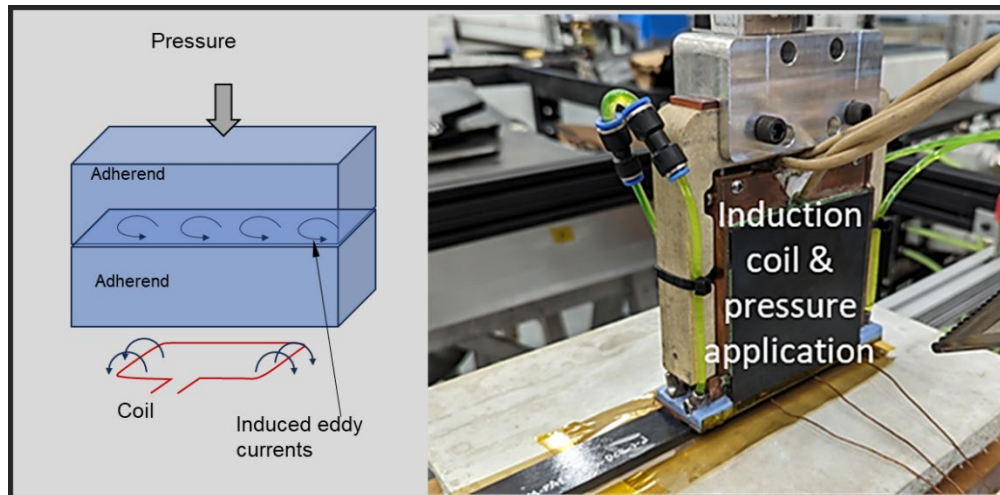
Induction welding schematic and equipment used for this study.
